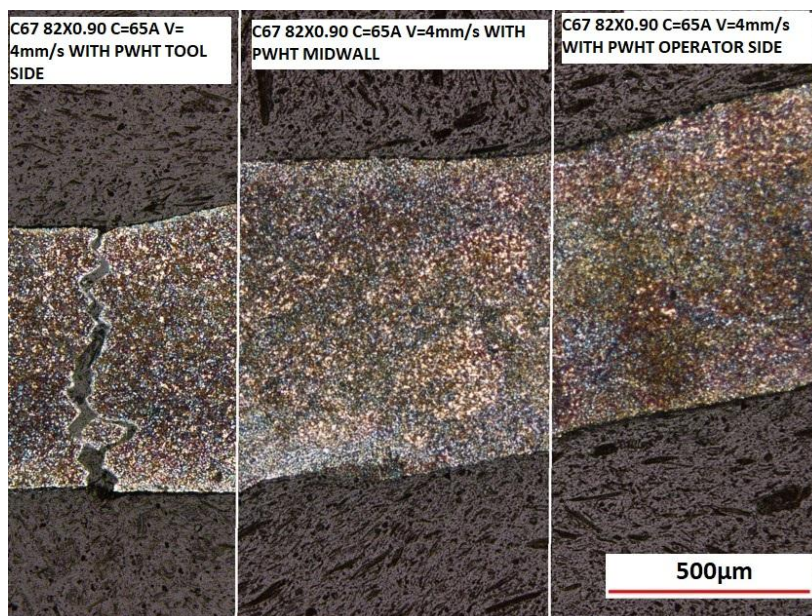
The welding section in tool's, midwall and operator side when the same parameters was used. The welding was performed with PWHT.
